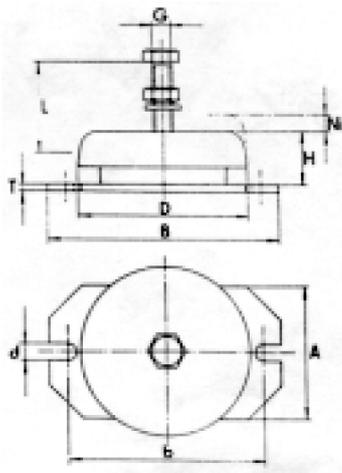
Level Mount Elements, LM Type, Special design bottom plate (BA)
